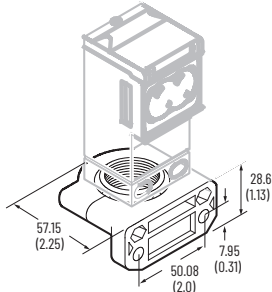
Swivel/tilt Mounting Assembly #60-2681 for ClearSight 9000 [mm (in.)]
